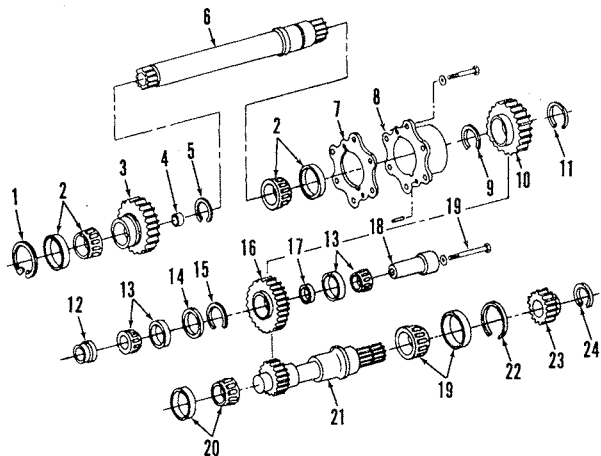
Exploded view of mechanical front-wheel drive power train used on 4050, 4250 and 4450 Power Shift models.
